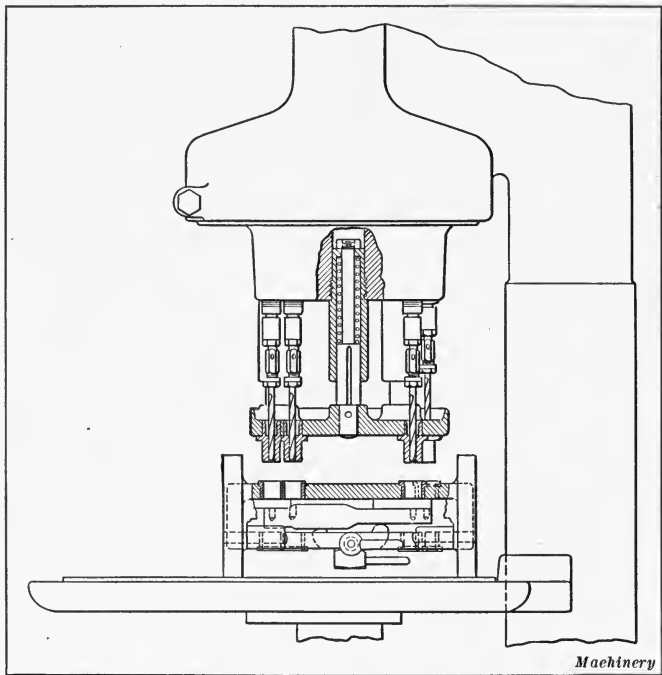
Partial Side Elevation of Drill Head used on Machine at Left in Fig. 11, showing Sub-jig and Jig in Position for First Drilling Operation
